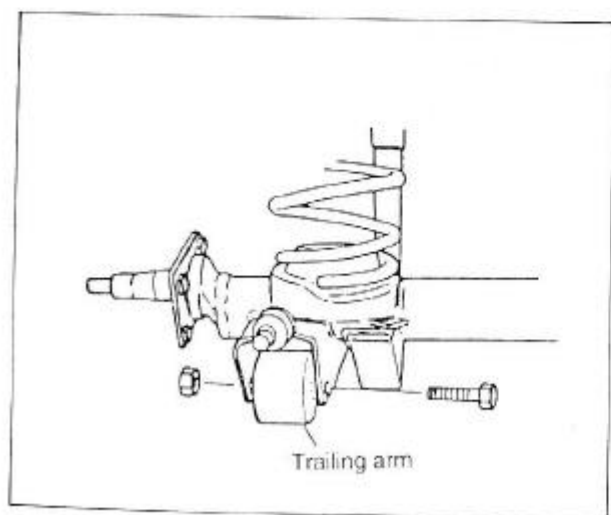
E — 12 INSTALLATION OF TRAILING ARM
